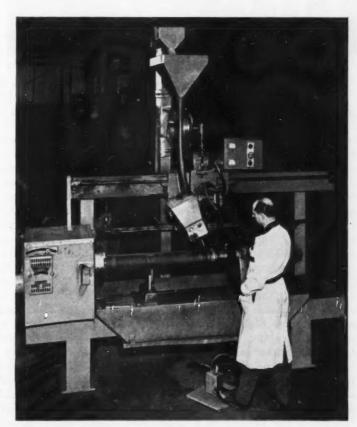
On this welding machine the work-piece is held by a chuck on a variable-speed headstock and by an air-operated tailstock.
